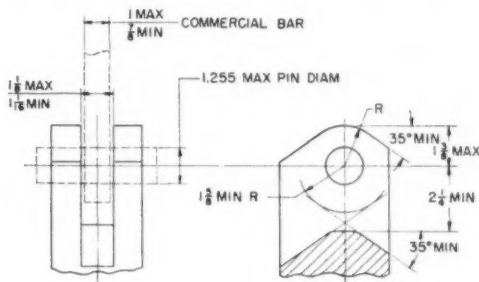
Yoke clearances (rod end) for 16-in-stroke hydraulic cylinder
